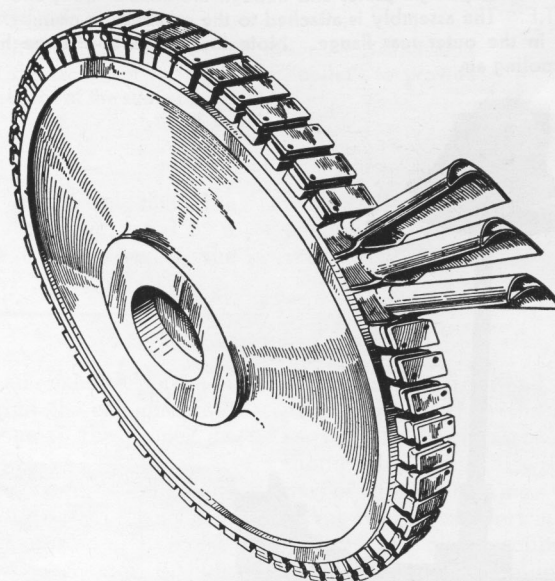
Turbine disk detail sketch illustrating the method of attaching hollow blades. The groove in the disk stub is filled with special high-temperature silver-base brazing flux. The blade is then pinned into place, and the entire unit heated. Two small holes on the ends of the disk stubs direct cooling air through the blade roots.
